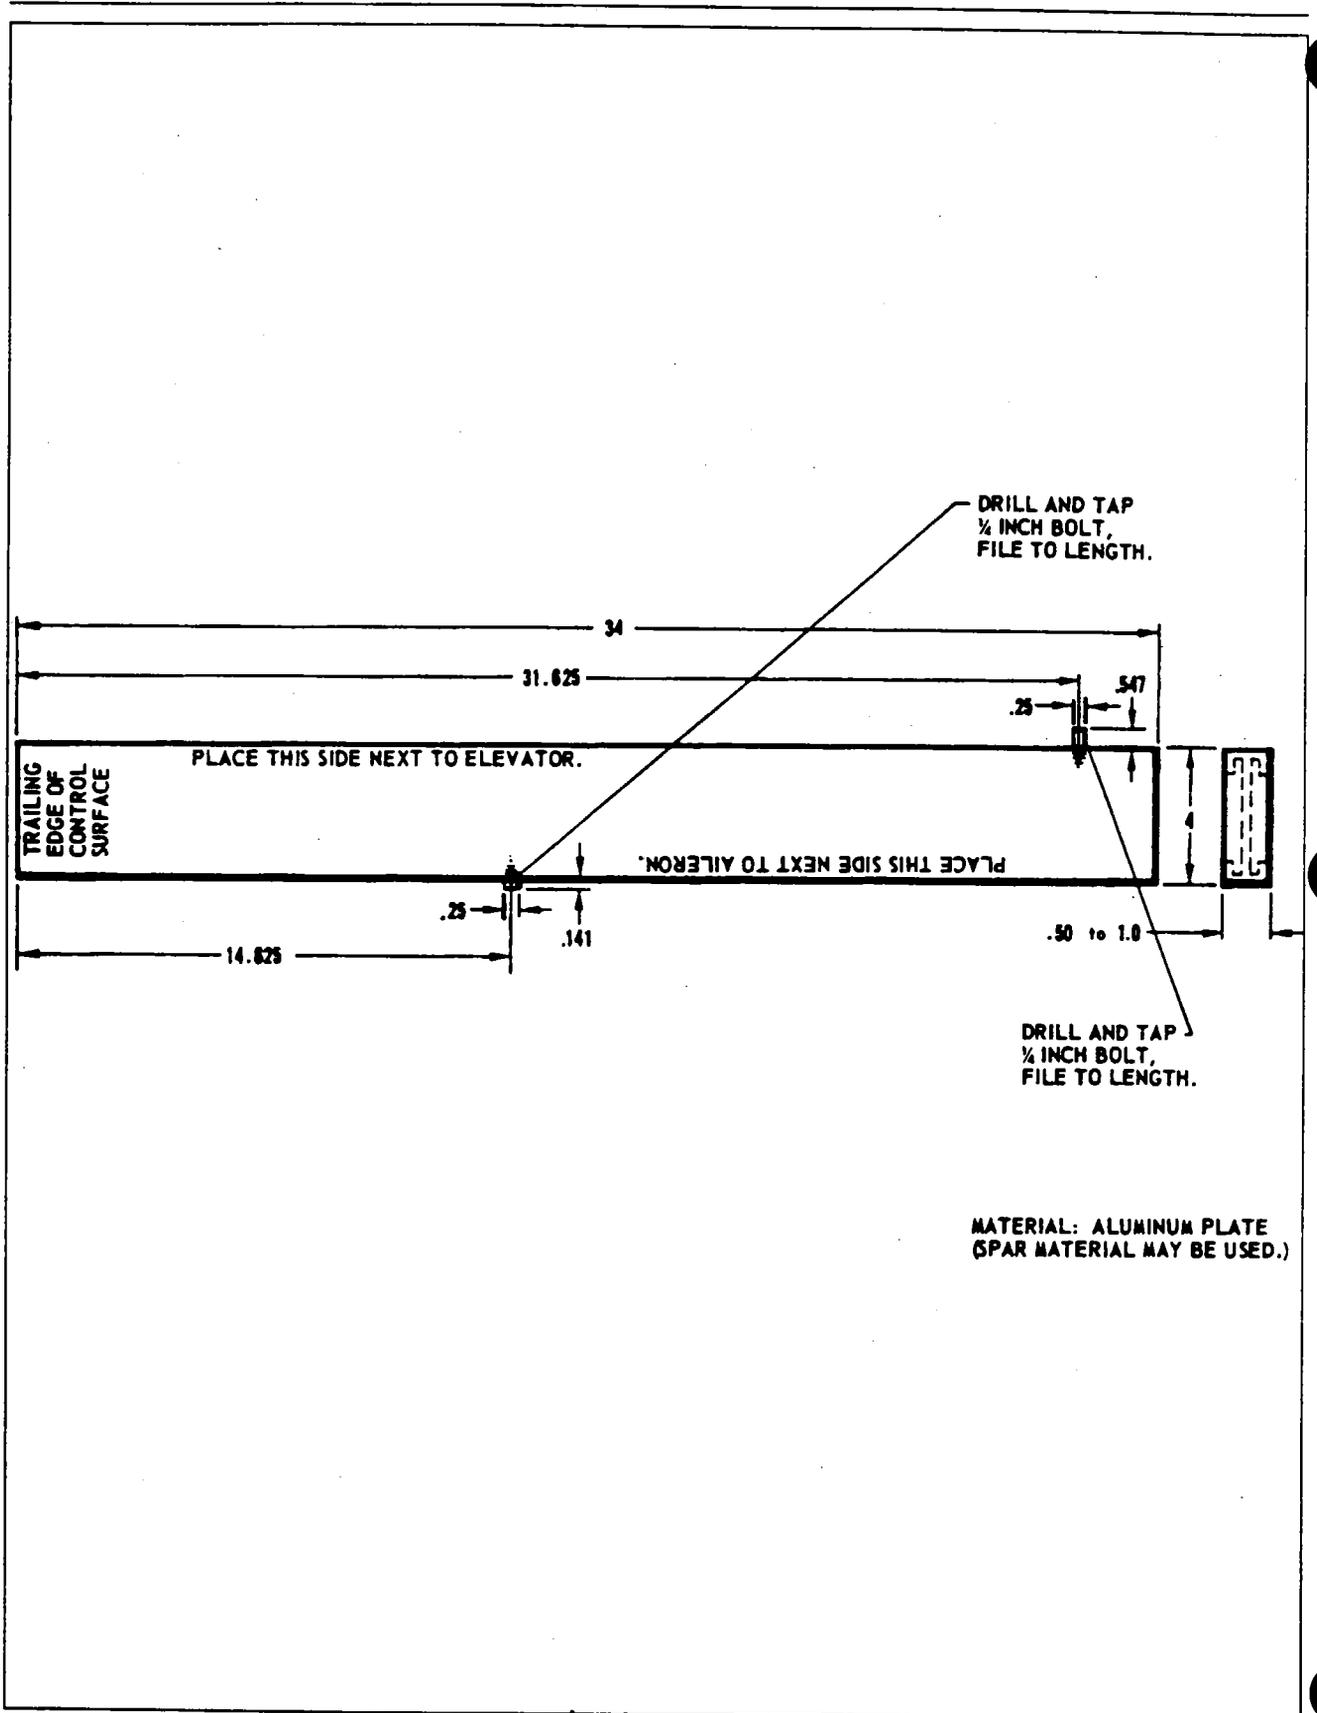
Fabricated Aileron-Elevator Rigging Tool
